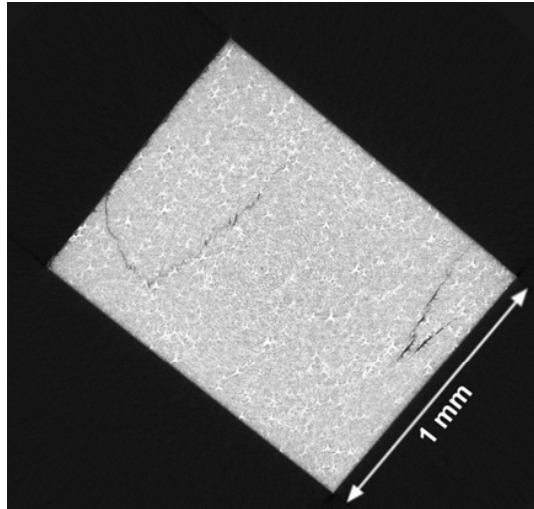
Cross section of the root flaw in a plane perpendicular to the welding direction.
